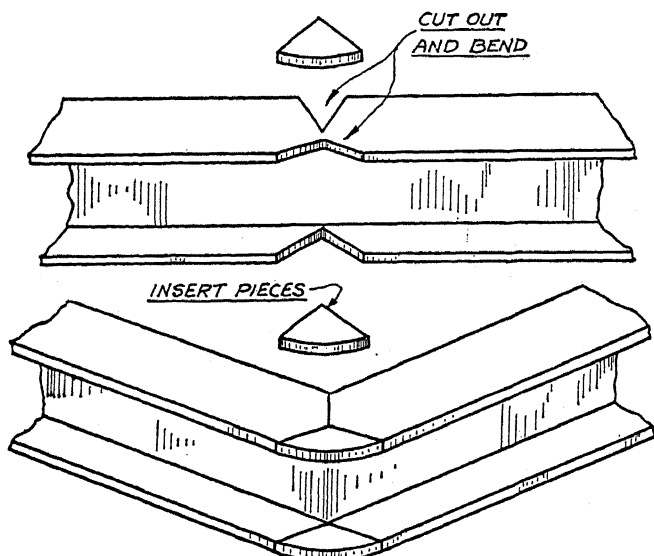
A method of securing a round corner on an I beam base through the use of flame cutting and arc welding.
